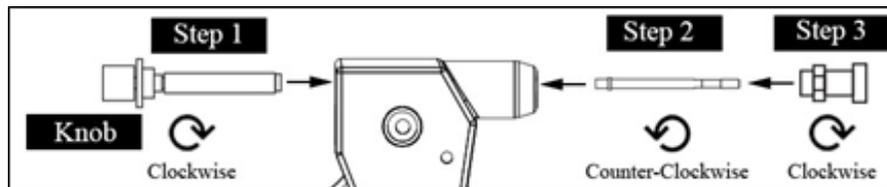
Installing accessories for fastening rivet nut or rivet stud
